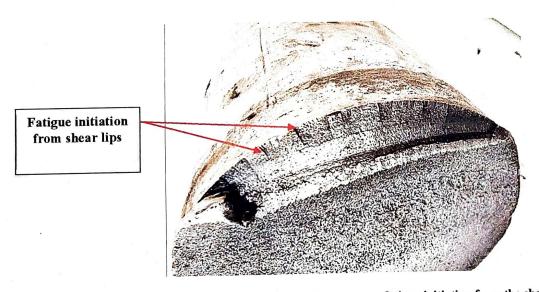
Photograph of fracture face showing shear lips and subsequent fatigue initiation from the shear lips in sample no. 153/23/2.
